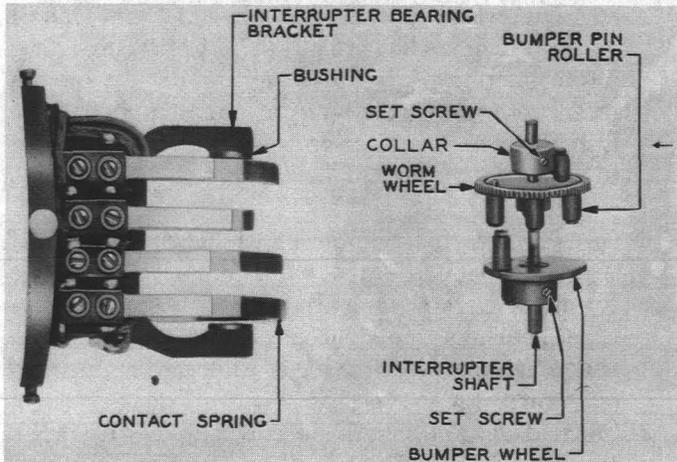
Interrupter Details (Holtzer-Cabot Machines)
